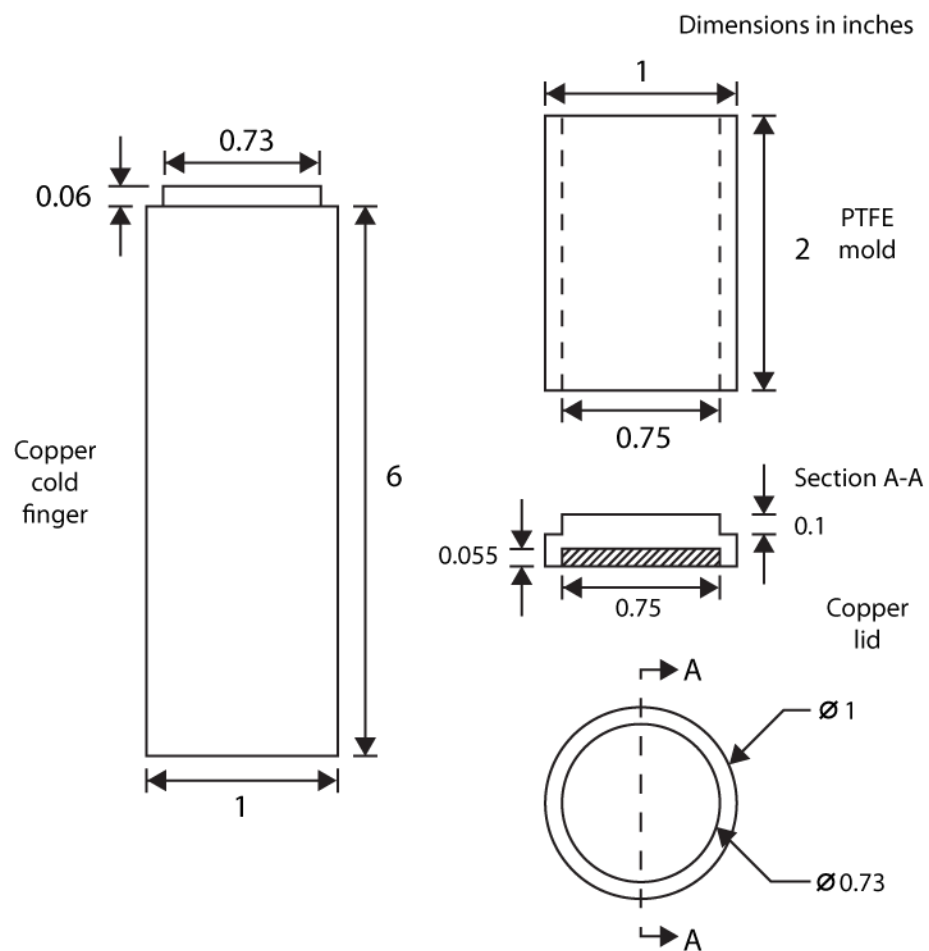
Dimensioned drawing of copper cold finger, PTFE mold, and copper lid.
